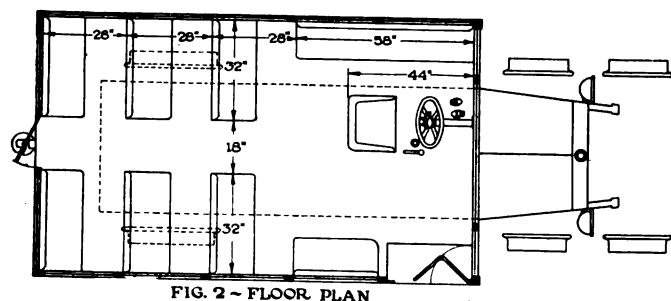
Plan and Fig. 3, side elevation of body layout employed
